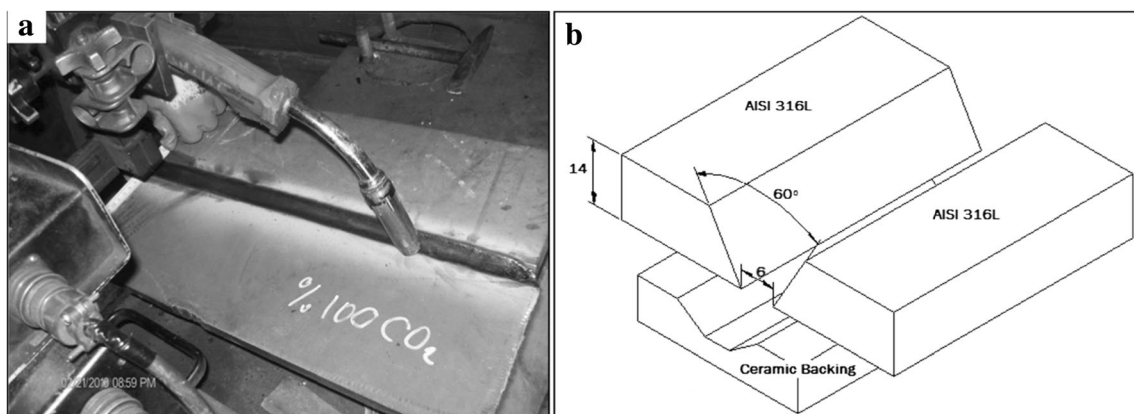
a The assembly of welding equipments and performing of the welding. b Scheme of joint preparation
